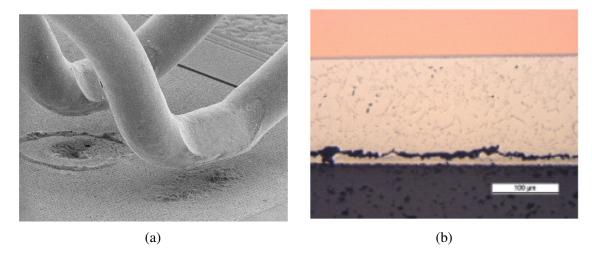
IGBT failure mechanisms (a) Bond-wire lift-off (b) Solder joint cracking [34].
